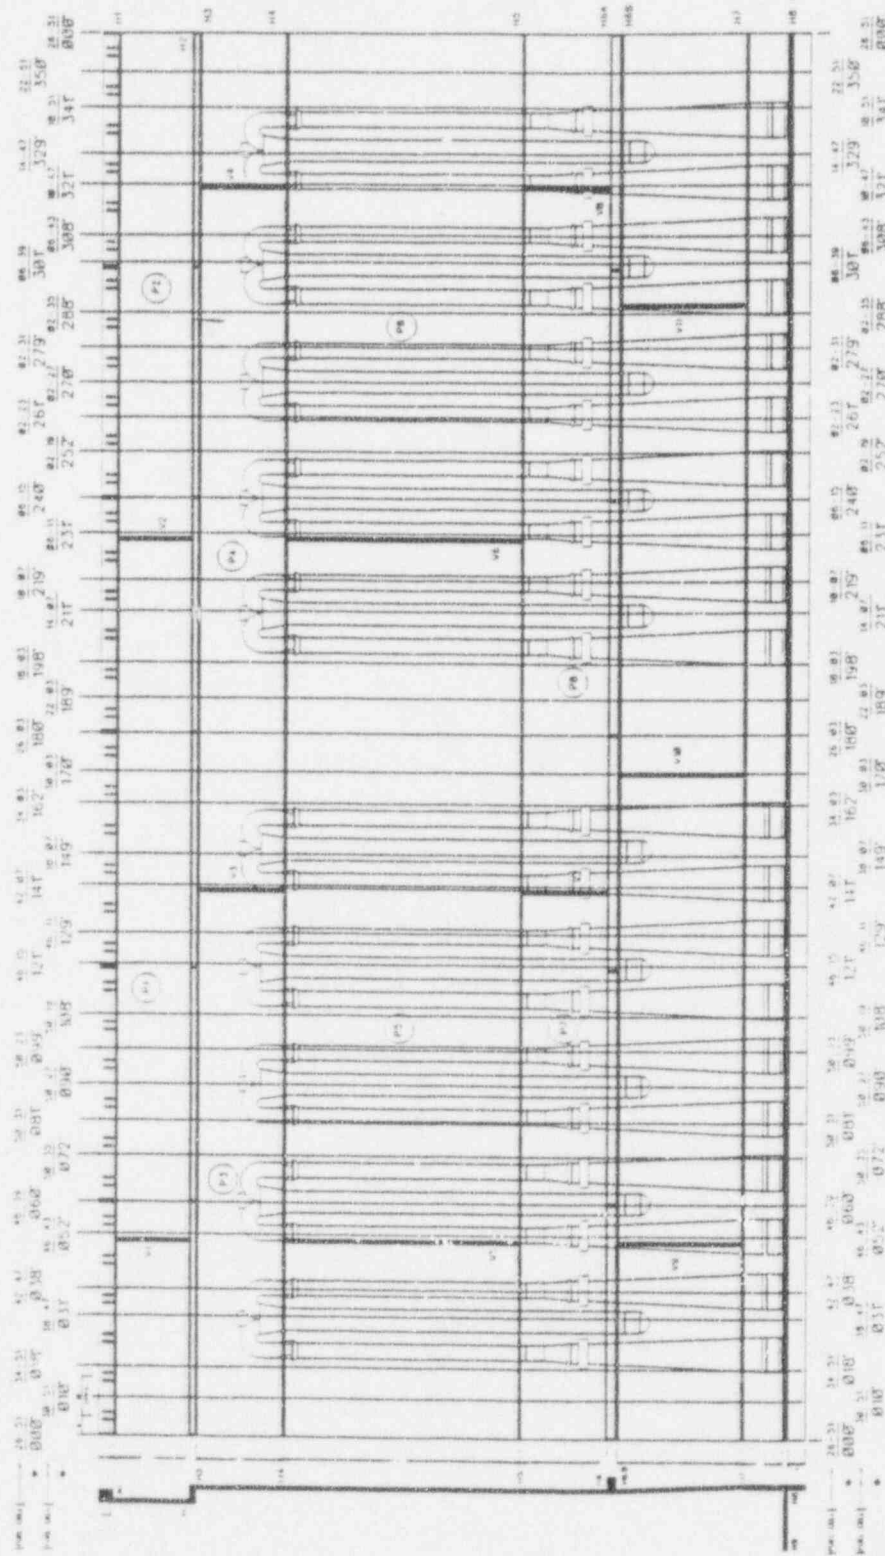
Roll-Out View of Outside Shroud Surface
